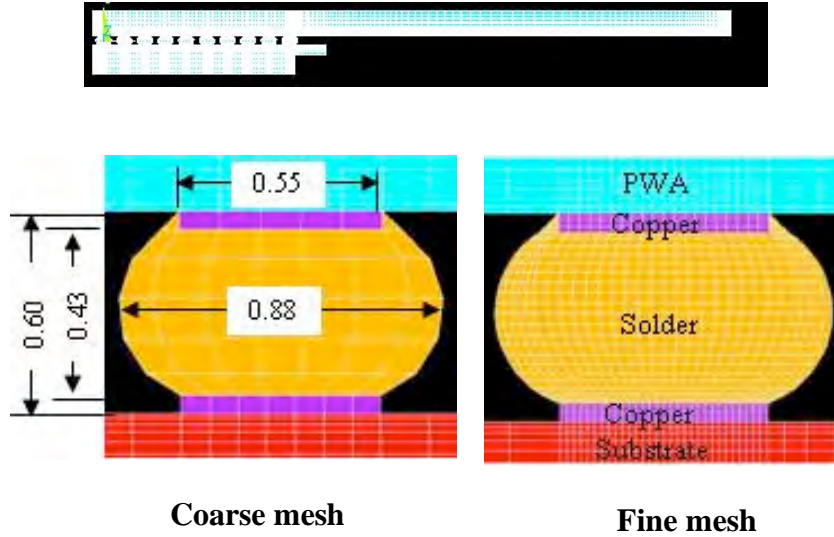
2D model of PWA with coarse mesh for inner solder balls and fine mesh for the outermost solder ball. All dimensions are in millimeters.
